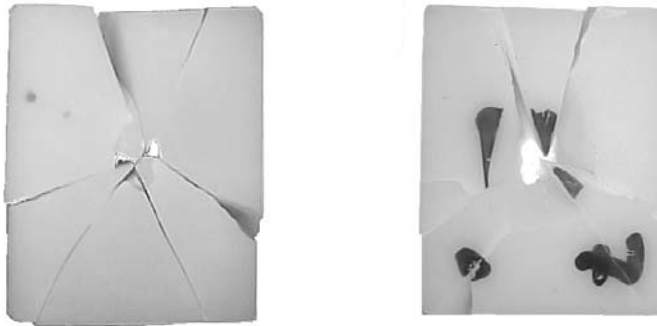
Top view on tensile side (left) and compressive side (right) of reassembled broken specimen having the fracture force of 2035N.
